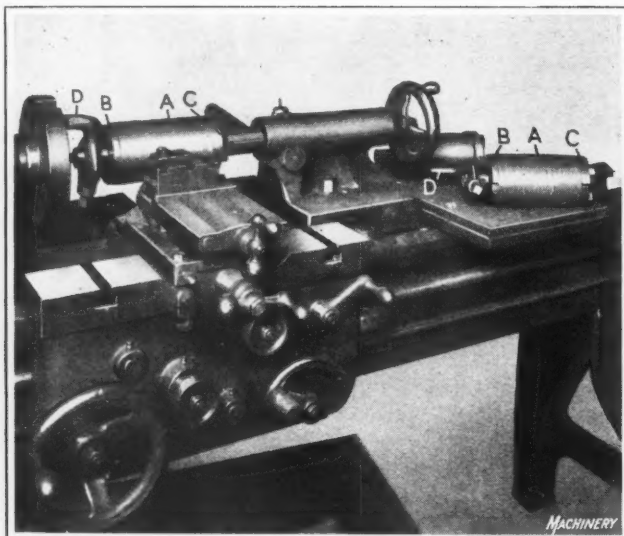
Multiple Work-holding Arbor used for setting up a Load of Outside Rings on a Lathe for rough-turning the Outside Diameter
